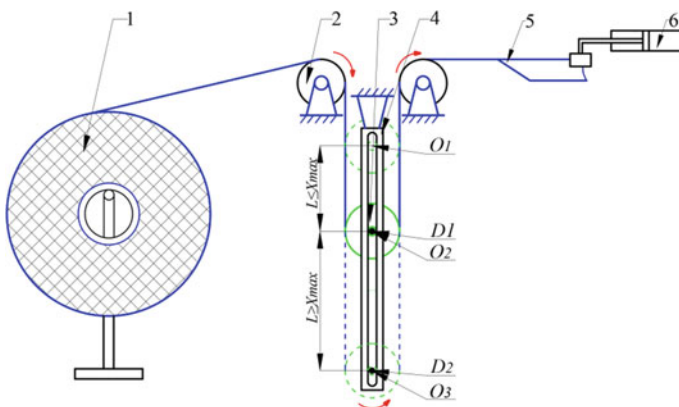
Diagram of a device for unwinding and pulling packaging material. 1—roll, 2—guide roller, 3—tension roller, 4—guide, 5—packaging material, 6—pneumatic cylinder
